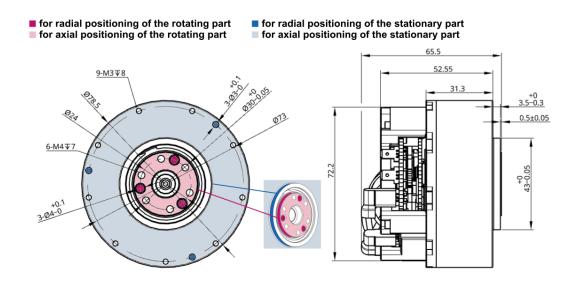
AJD-08-20-315-ECS1xx mechanical interfaces
